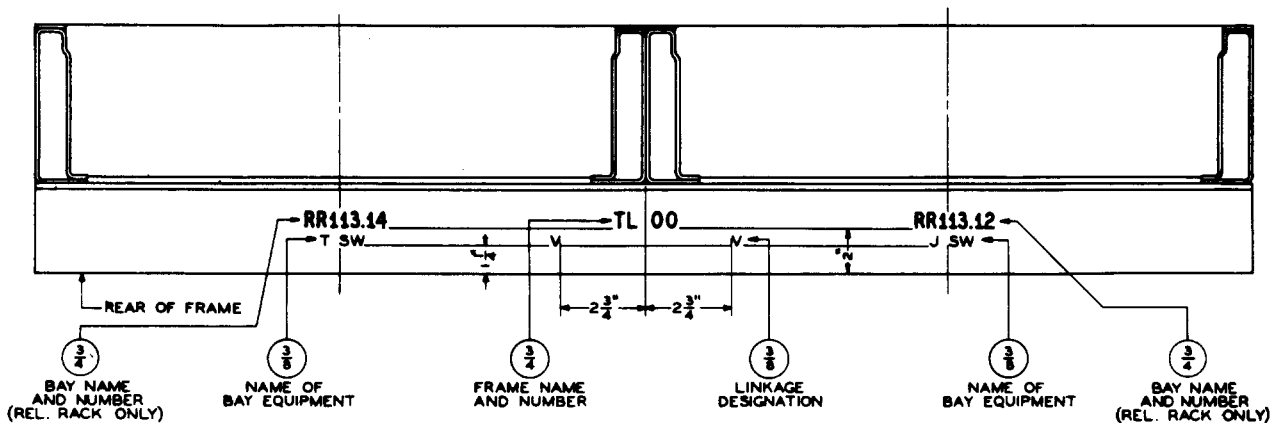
Plan View of Rear of Double-bay, Box-type Frame Base
